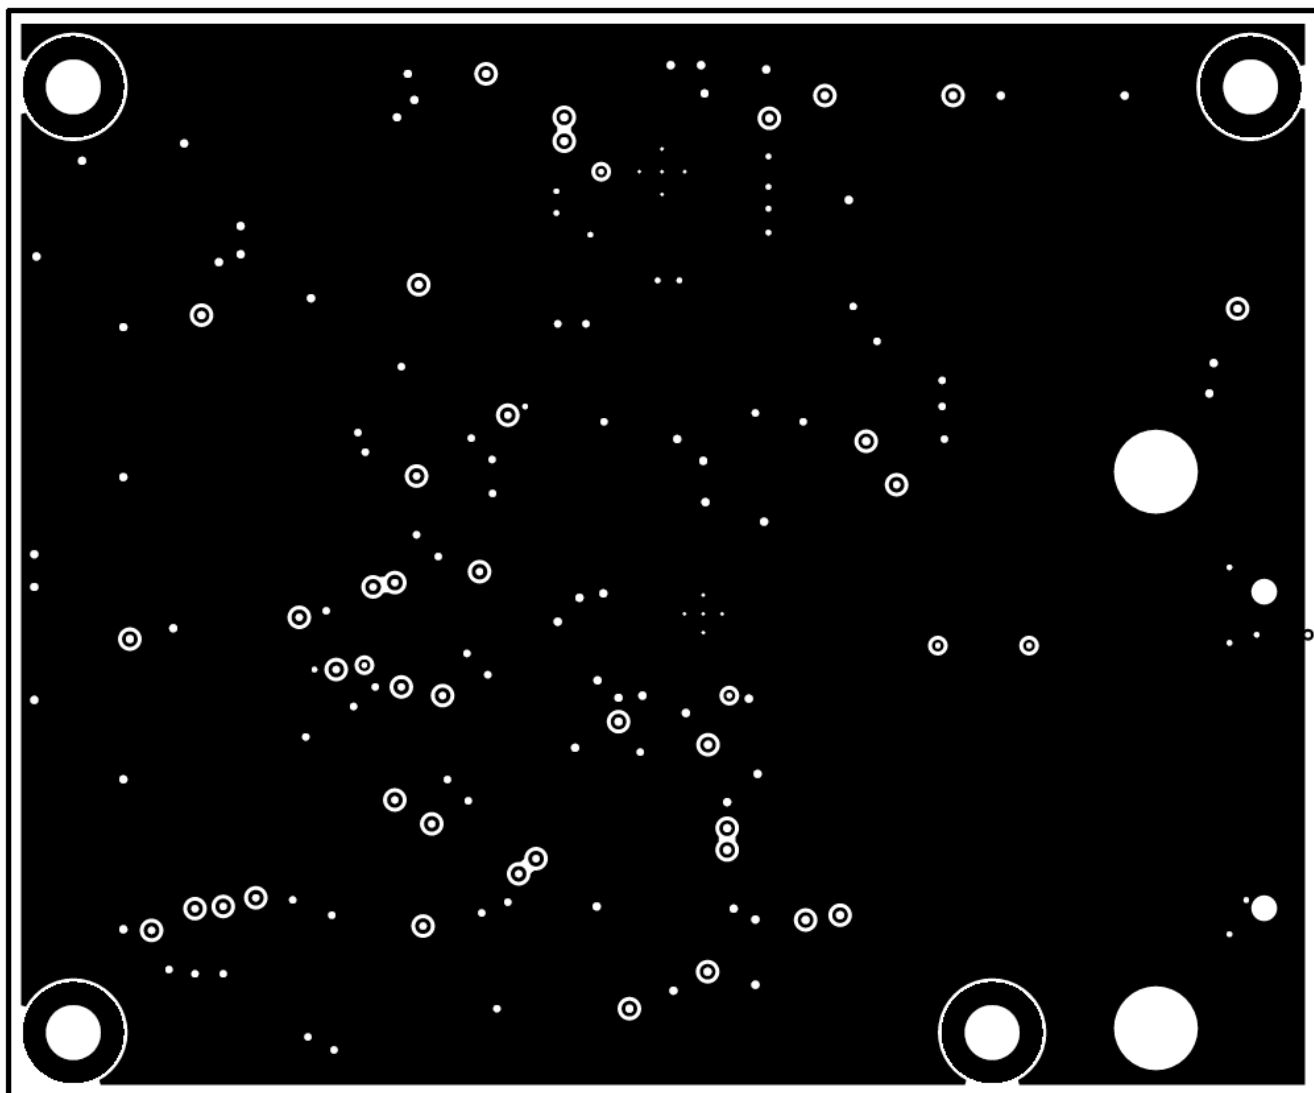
ADS9110EVM PCB Layer 2: GND Plane
